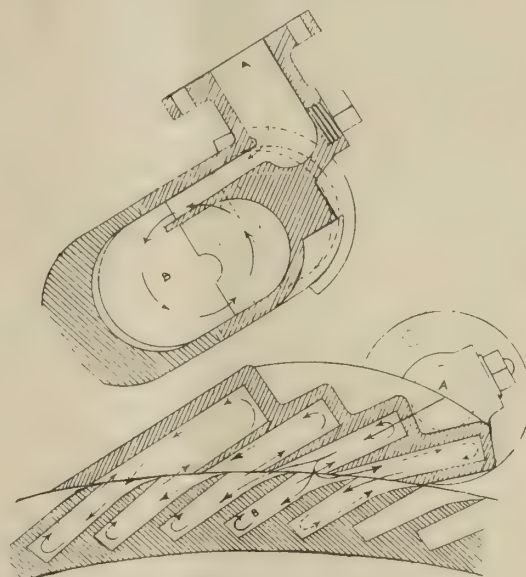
PORTION OF ROTOR AND REVERSING BUCKETS.
